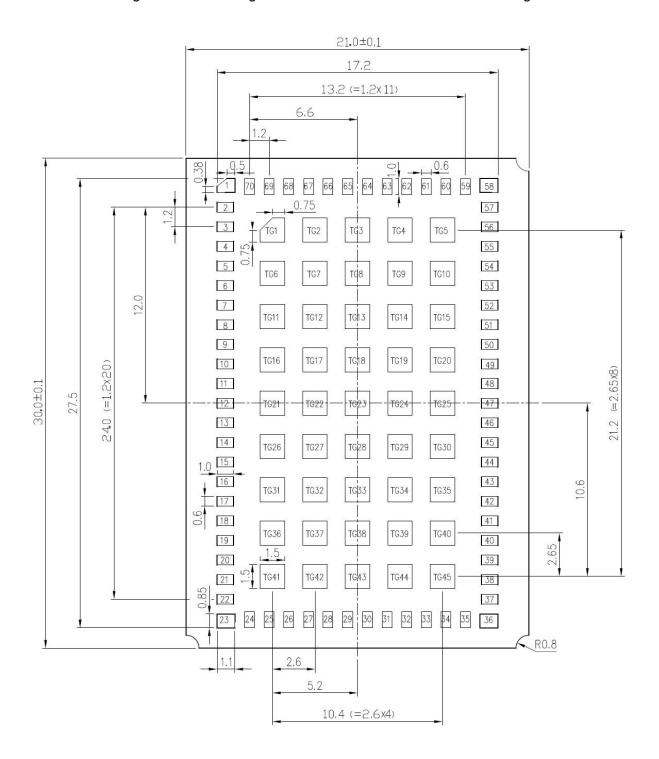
Recommended Design for PCB Bonding Pad (Unit: mm)
